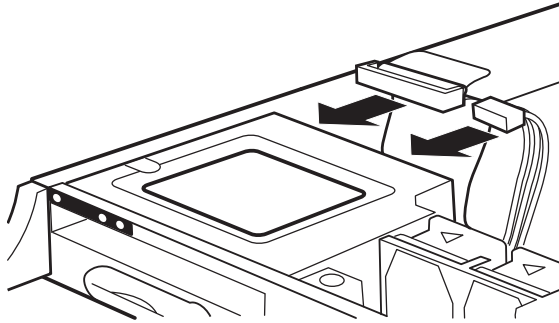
Connecting the Cables to the DVD Assembly
